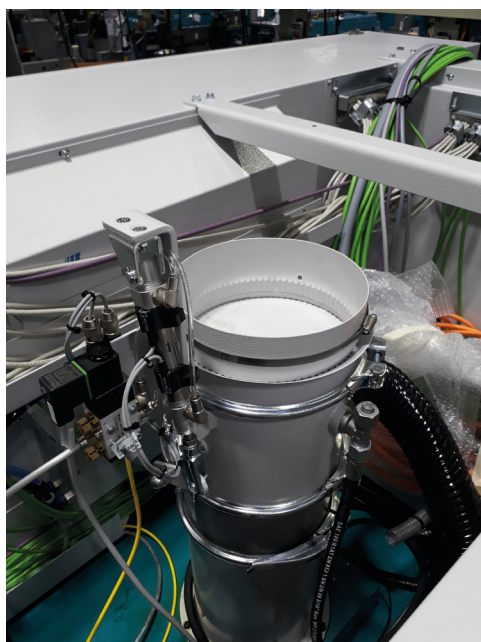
Shut-off valve provided for the connection of the machine to a central extraction plant.
